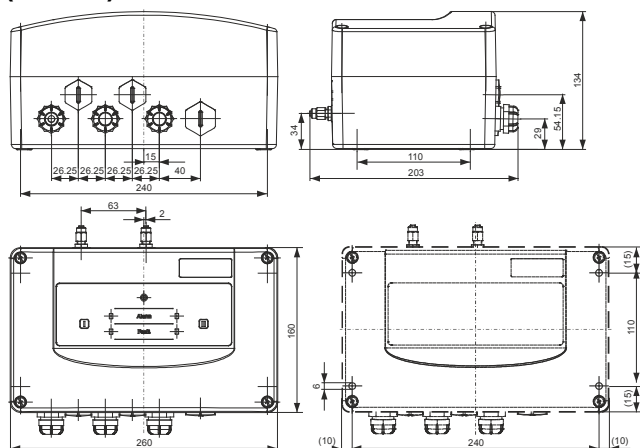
Dimensioned drawing, drilling plan for evaluation unit
